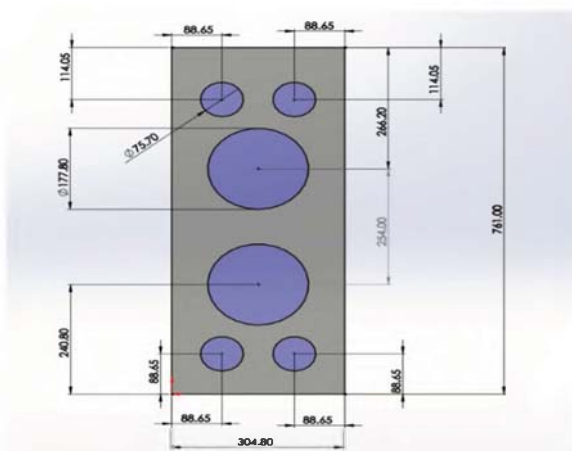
Aluminum Body Frame with Dimension (in mm)
